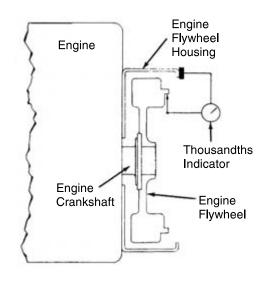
Checking the Flywheel Pilot Ring Bore Eccentricity
